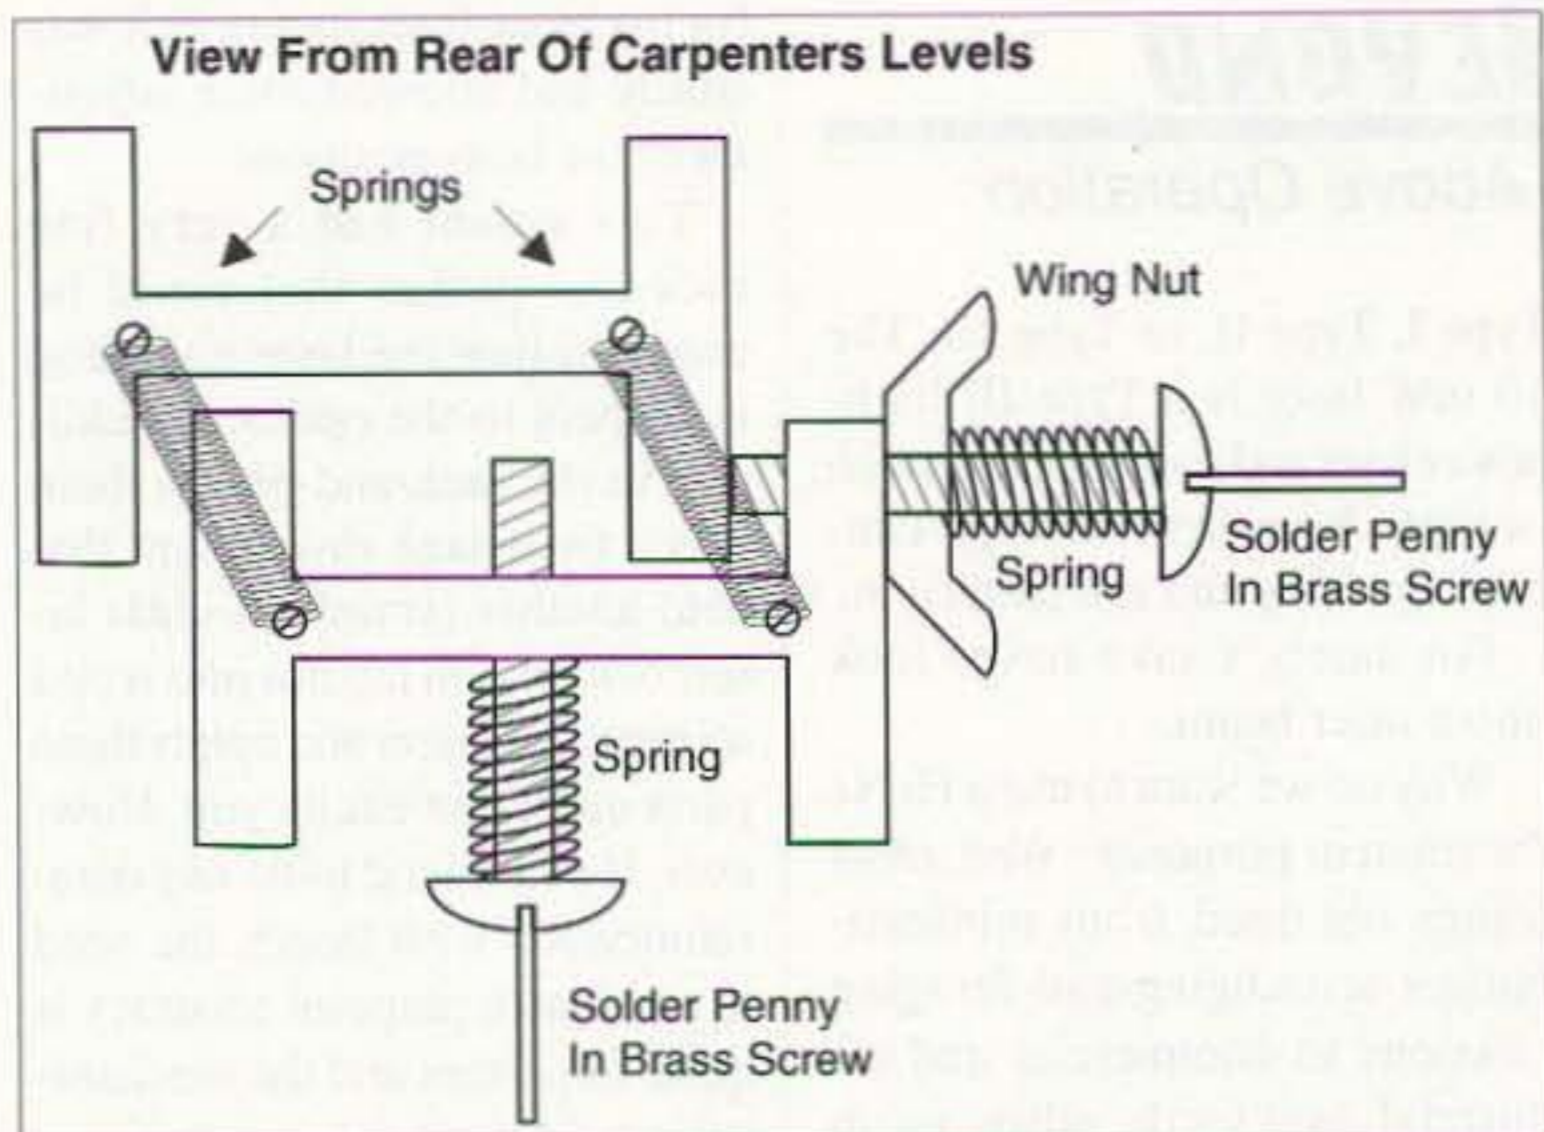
End section drawing of a laser two-screw positioning mount using two metal carpenter levels.
